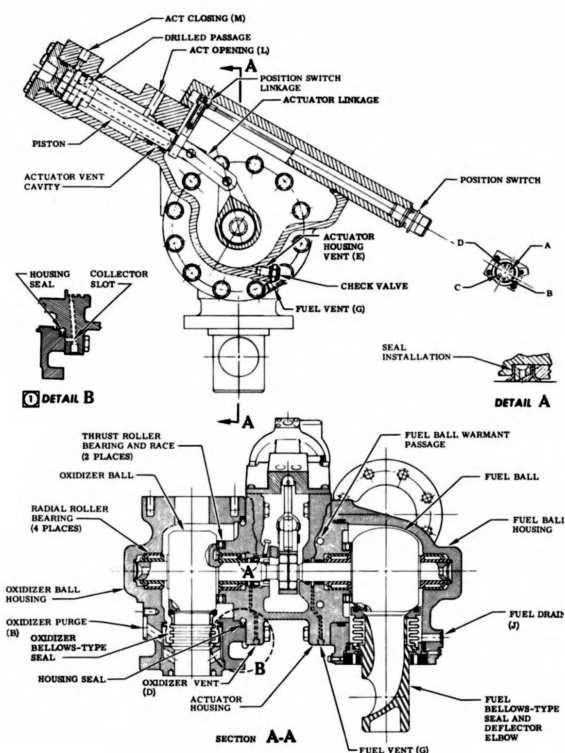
Cross section of the gas generator bipropellant ball valve of the F-1 rocket engine [31].
